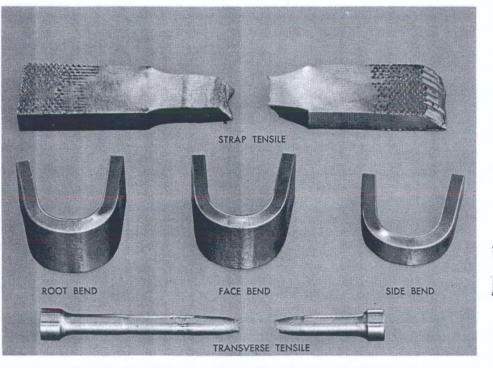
Weldments of RA 330 welded with RA 330-04-15 illustrating both strength of the weld deposit metal and ductility of the overall weldment.
